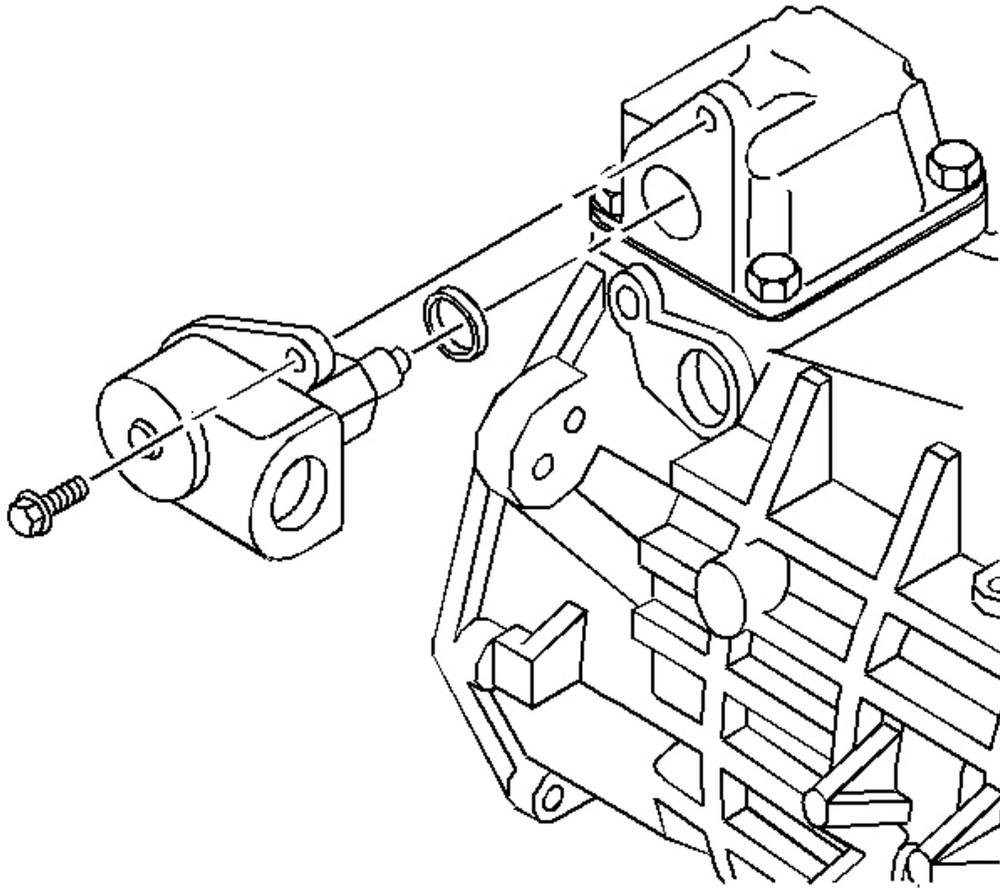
Installing/Removing Reverse Lockout Body & Bolt
